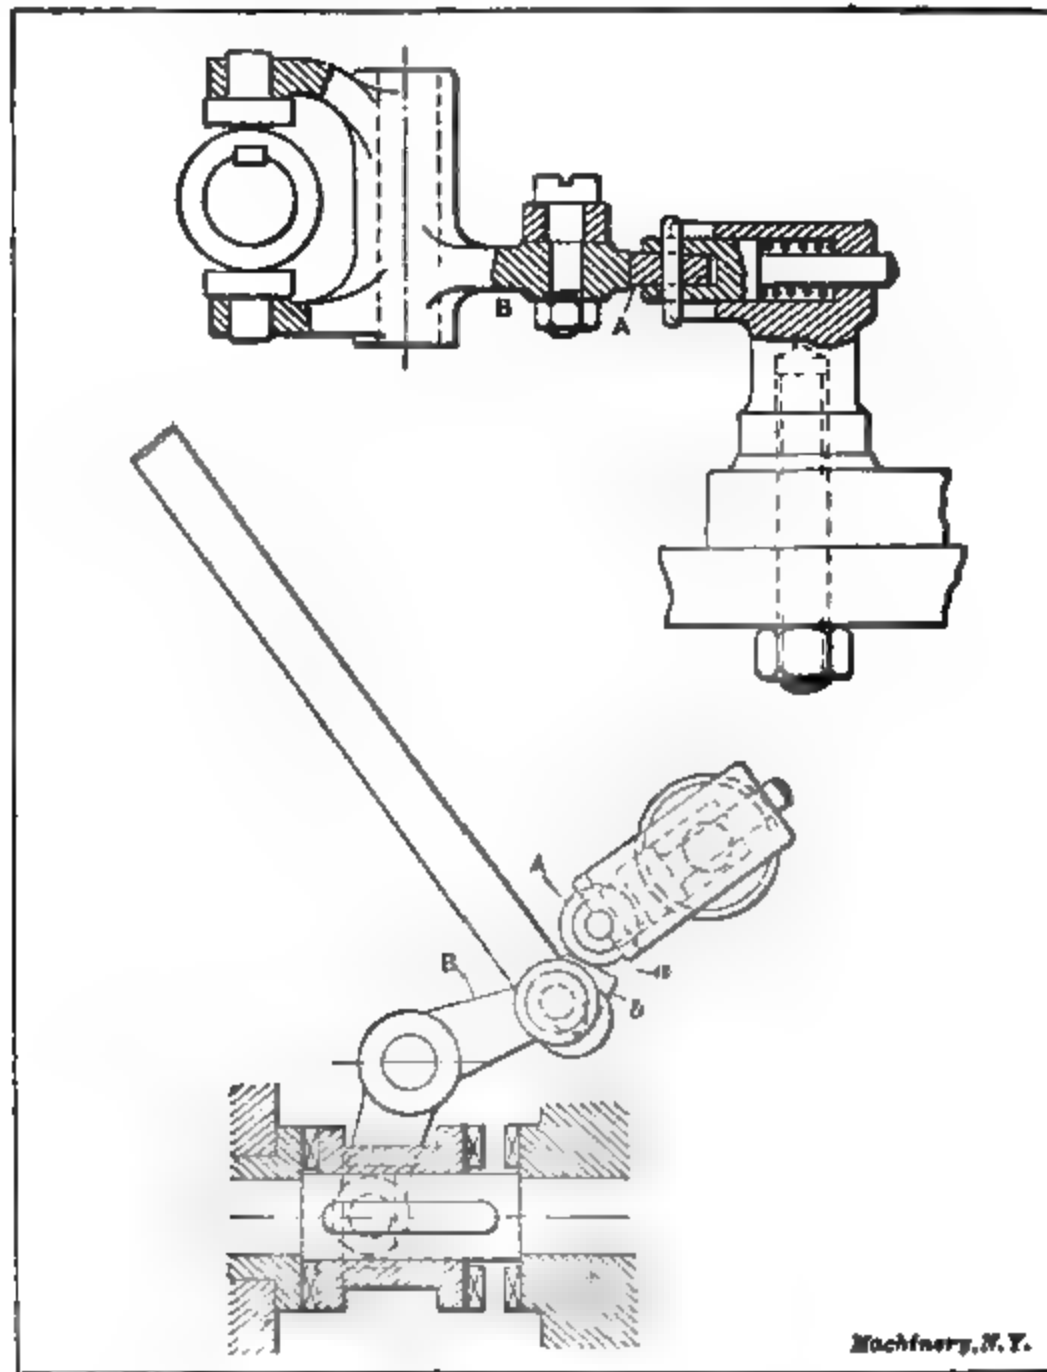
Spring Plunger applied to Clutch-reversing Mechanism
